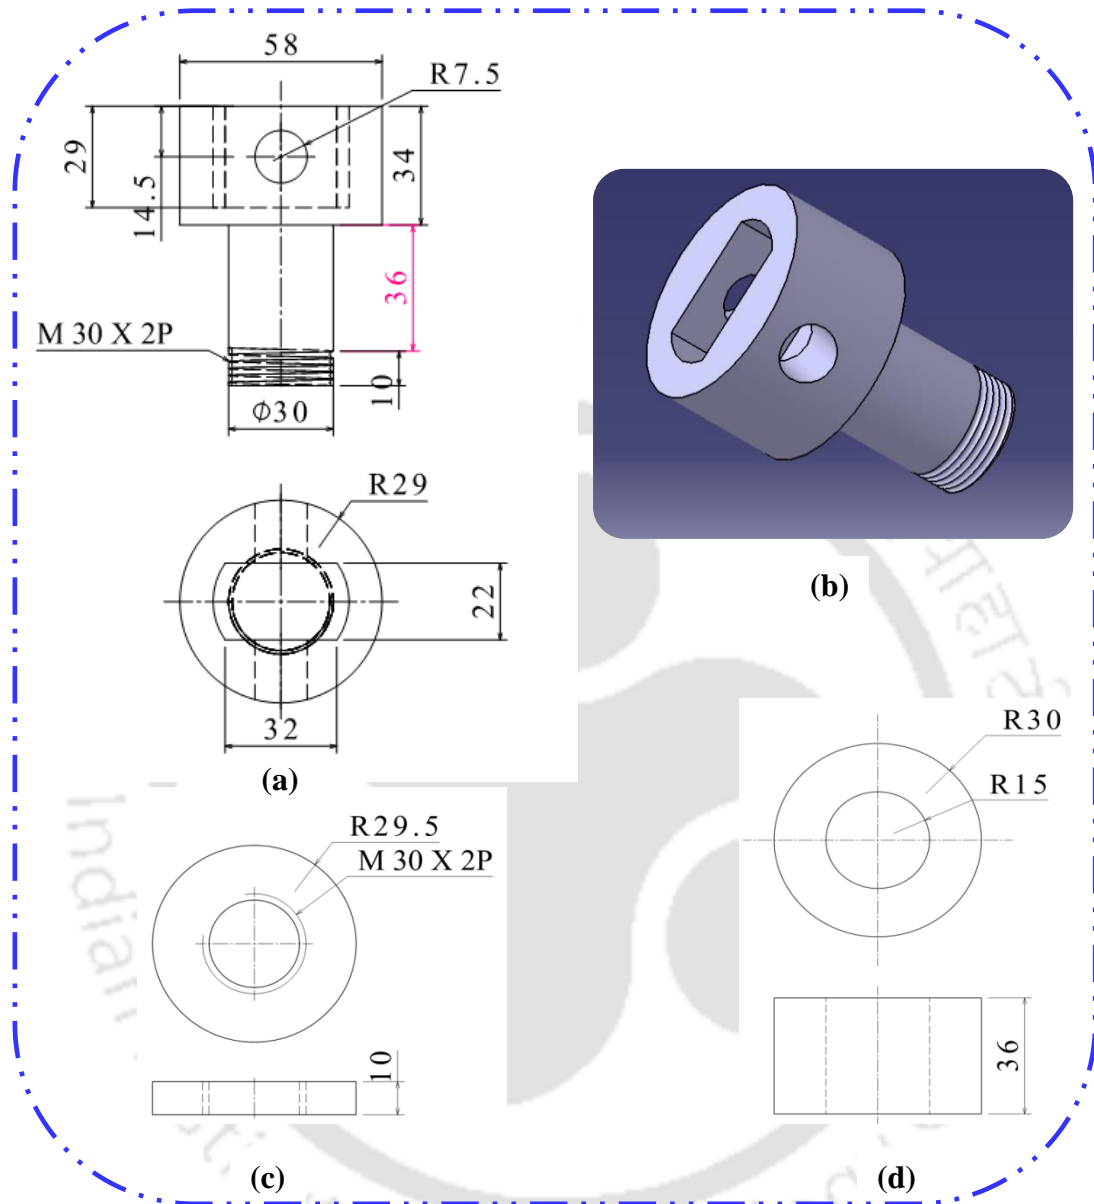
(a) 2-D drawing of piston with dimensions (b) 3-D model of piston (c) 2-D drawing of piston nut with dimensions (d) 2-D drawing of teflon piston ring with dimensions (All dimensions are in mm).
